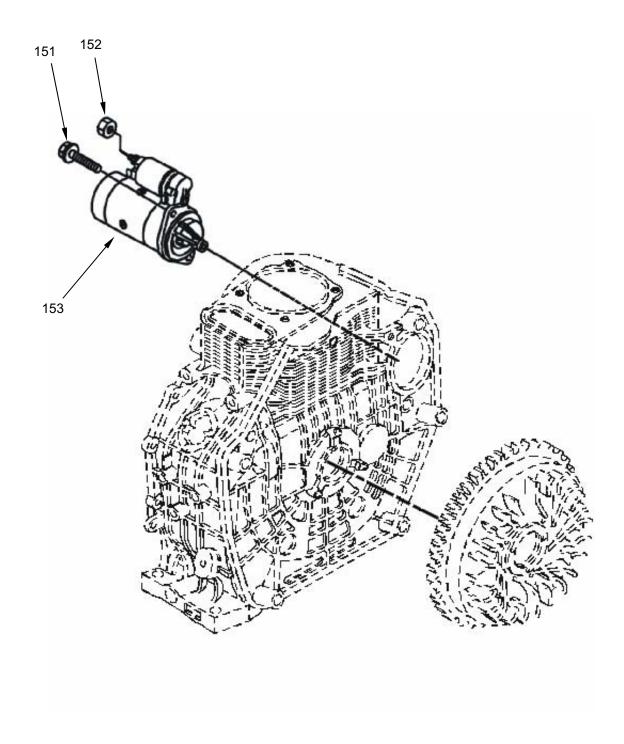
Engine, Diesel (Sheet 8 of 9) (Starting Motor and Dynamo).
